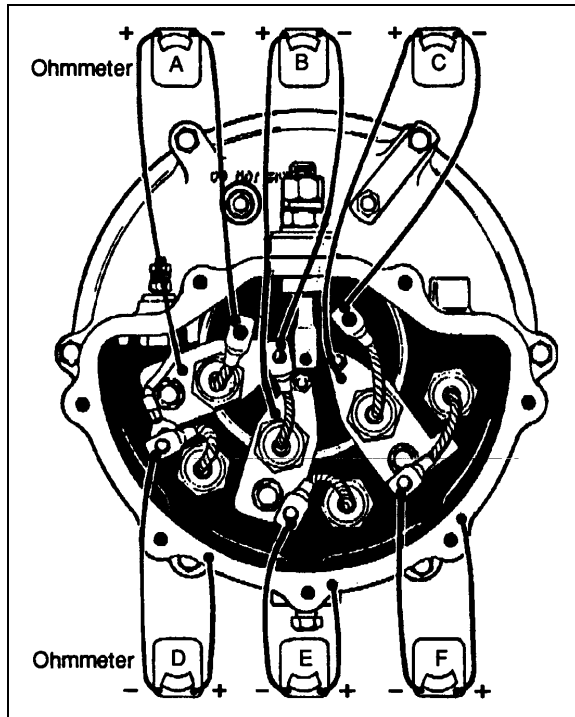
CHECKING DIODES WITH OHMMETER ON A TYPICAL OIL COOLED ALTERNATOR (END COVER REMOVED)
